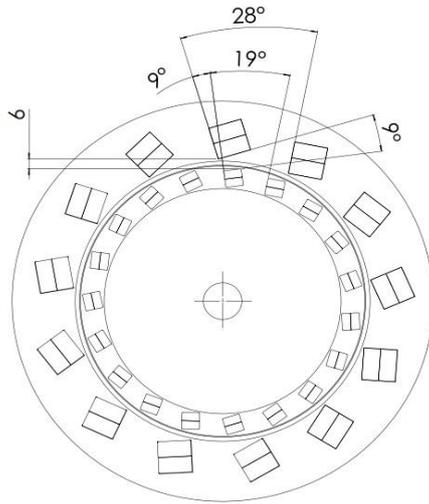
First arrangement of stator – rotor configuration in a 3D CAD format
